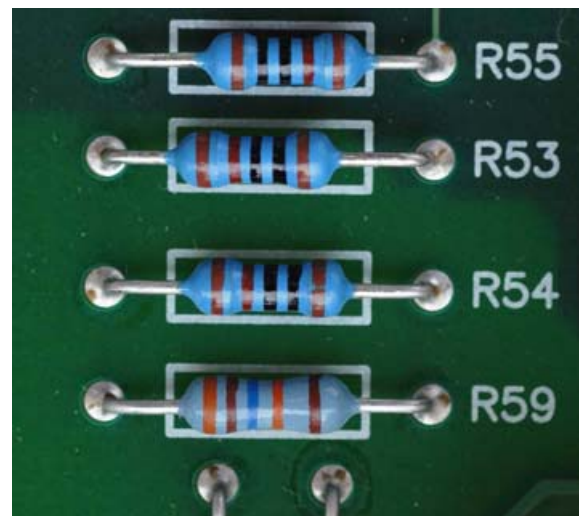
Sn100CL HASL 0.093 inch thick board soldered using K100LD.
